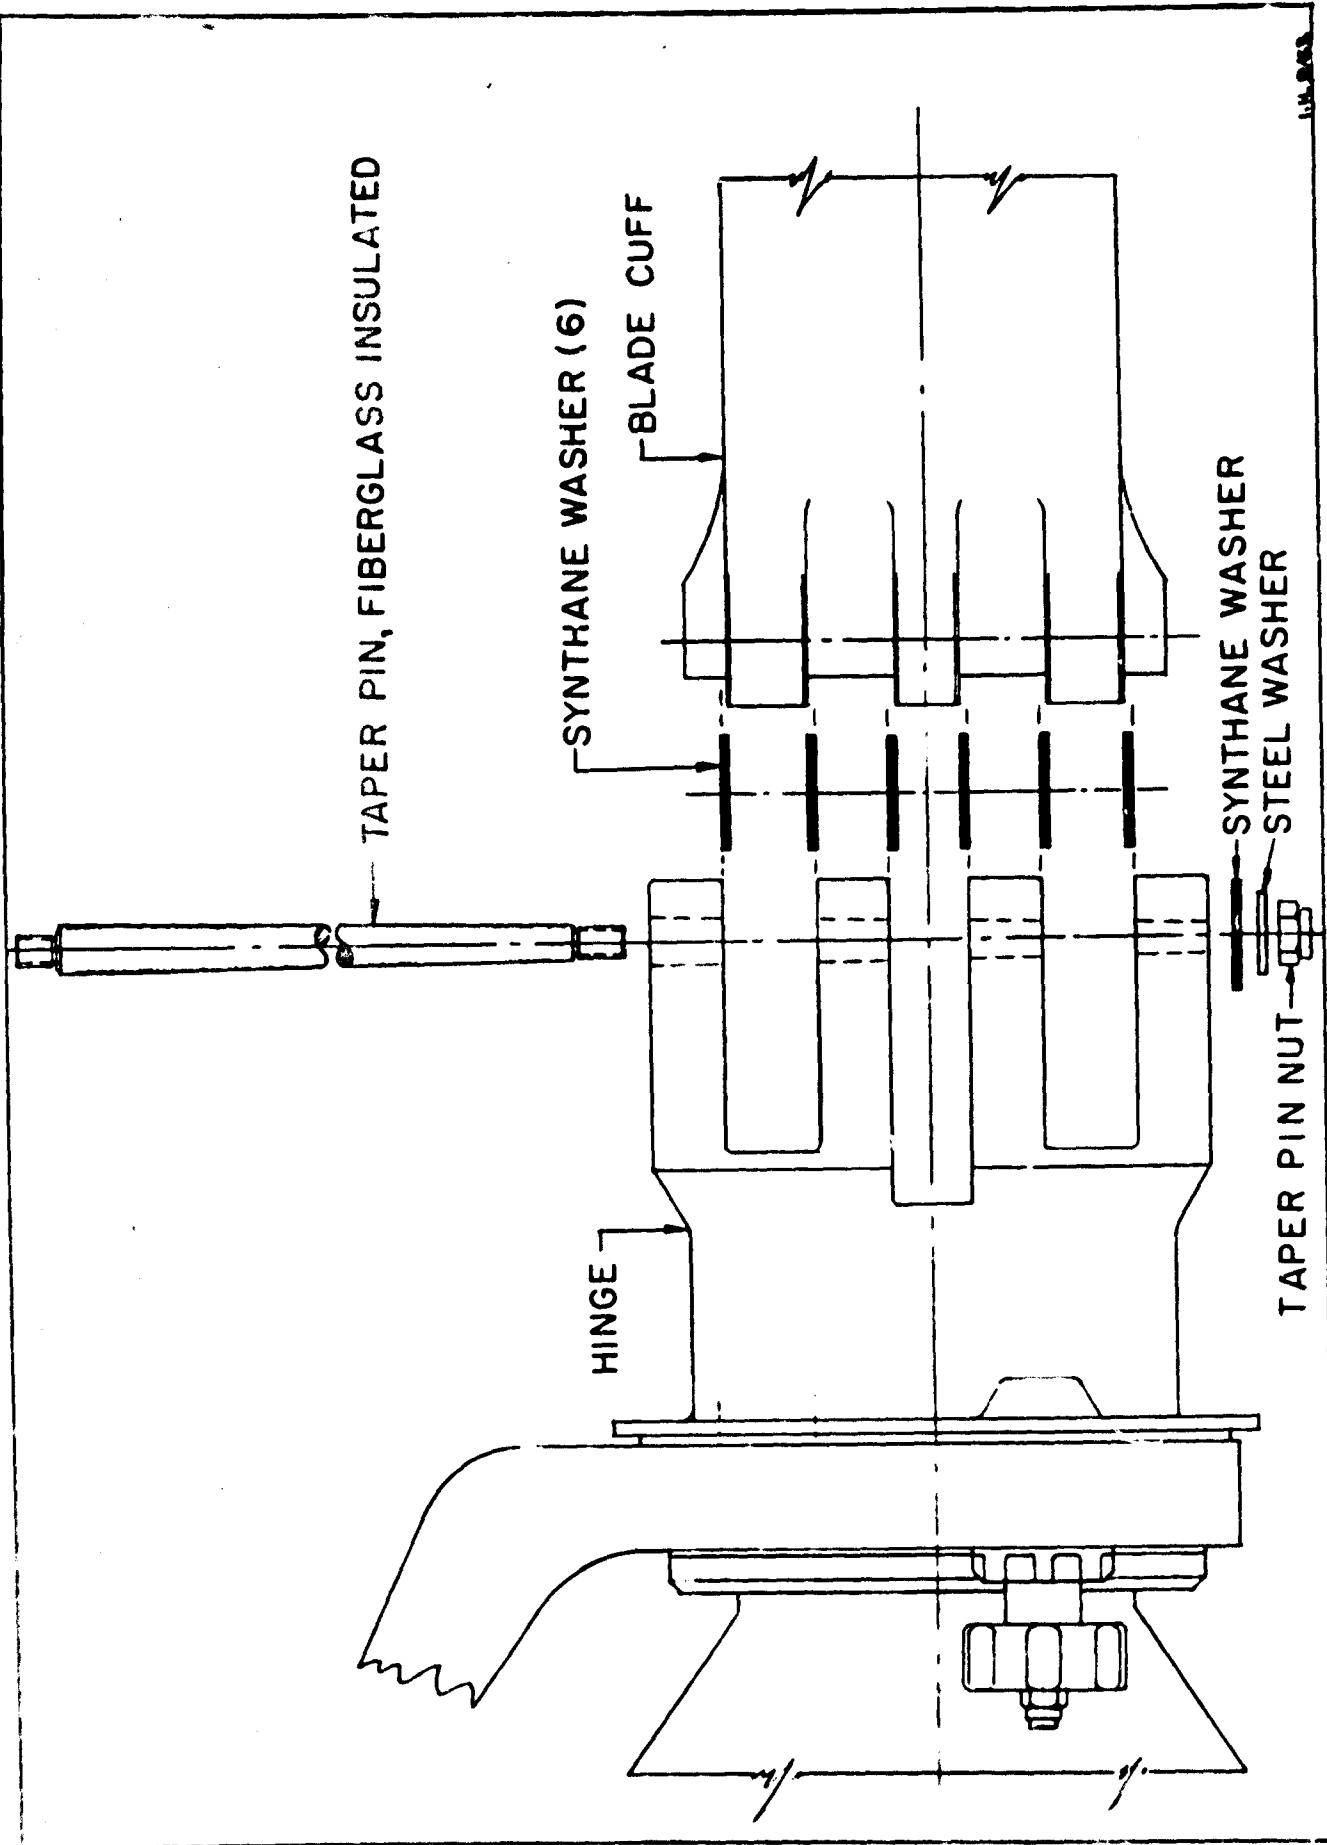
INSULATION OF CH-34 TYPE MAIN ROTOR BLADE.
